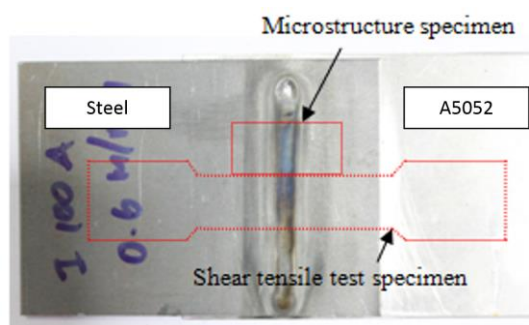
The cutting position on weld specimen for producing tensile-shear specimen in this study.
